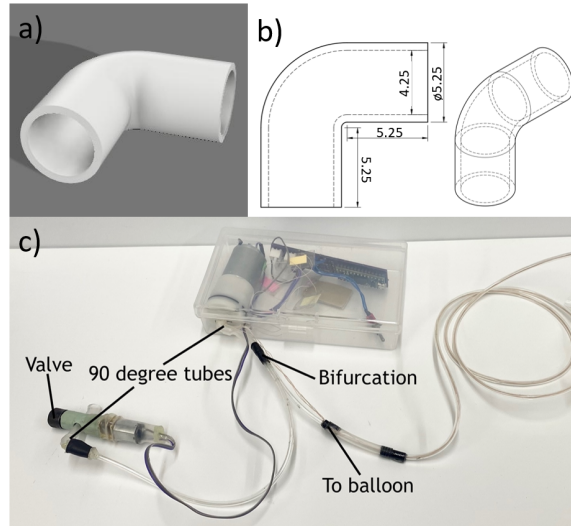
a) An illustration of the 90-degree tube. b) Dimensional drawing of the 90-degree tube. c) Assembly of the airflow system.
